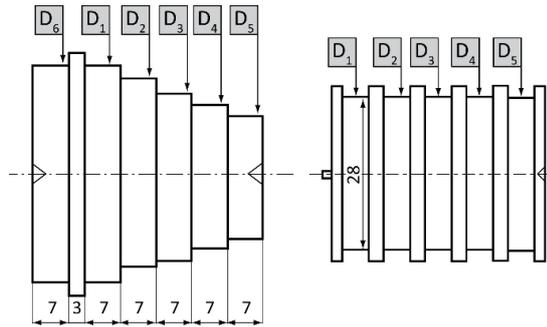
Different test pieces for six-spindle automatic lathe [13], [14]
